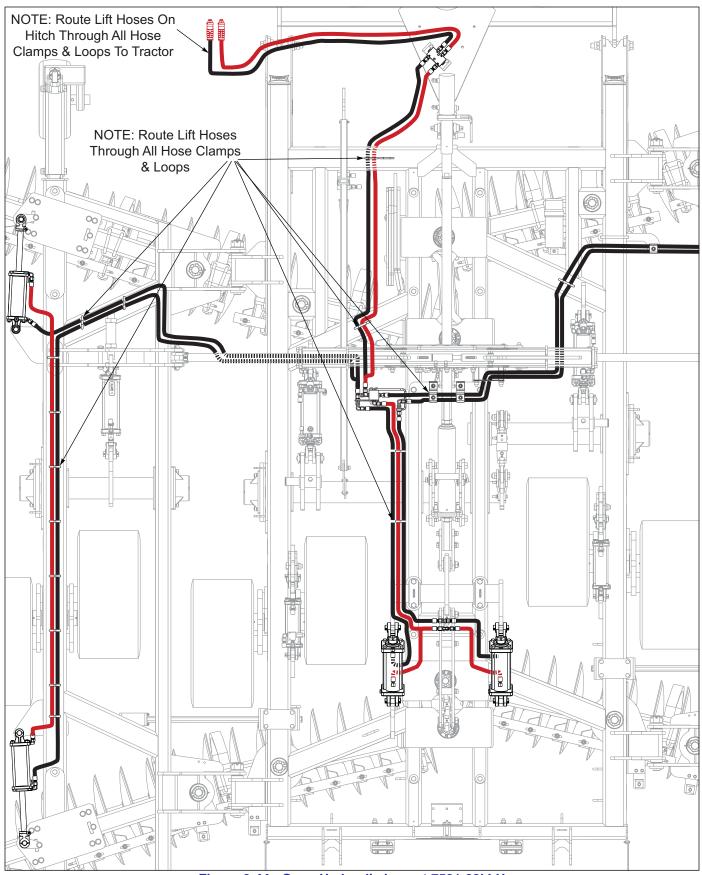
Gang Hydraulic Layout 7531-23' LH
